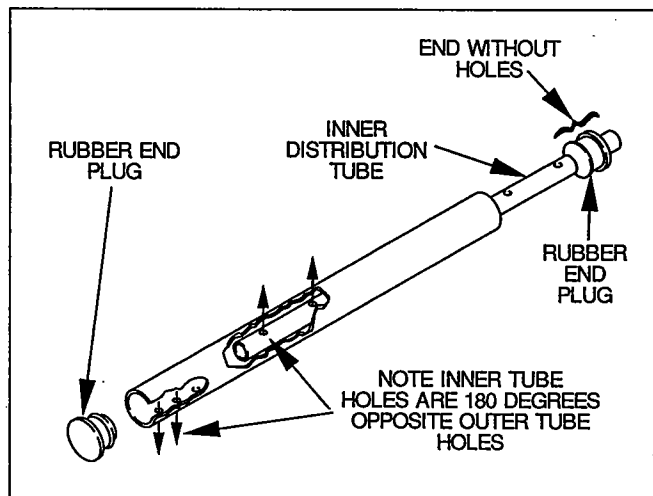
DISTRIBUTION TUBE DISASSEMBLY
